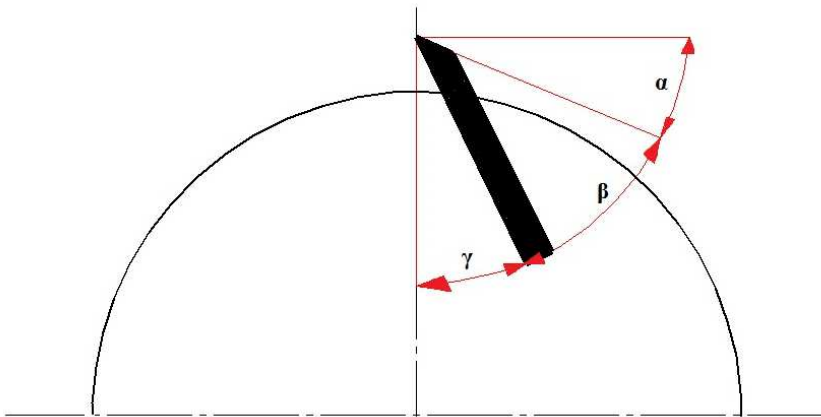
Planer tool sharpness angle sharpening angle $\alpha \neq const$; wedge angle $\beta \neq const$;
